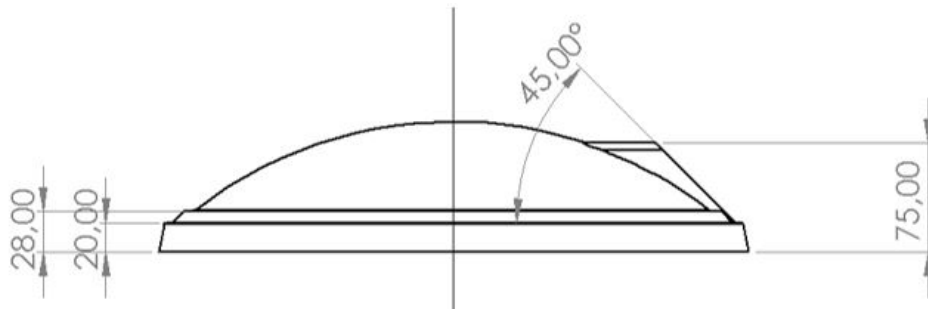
Side view drawings of the dome design. Dimensions in micrometres [μm].
